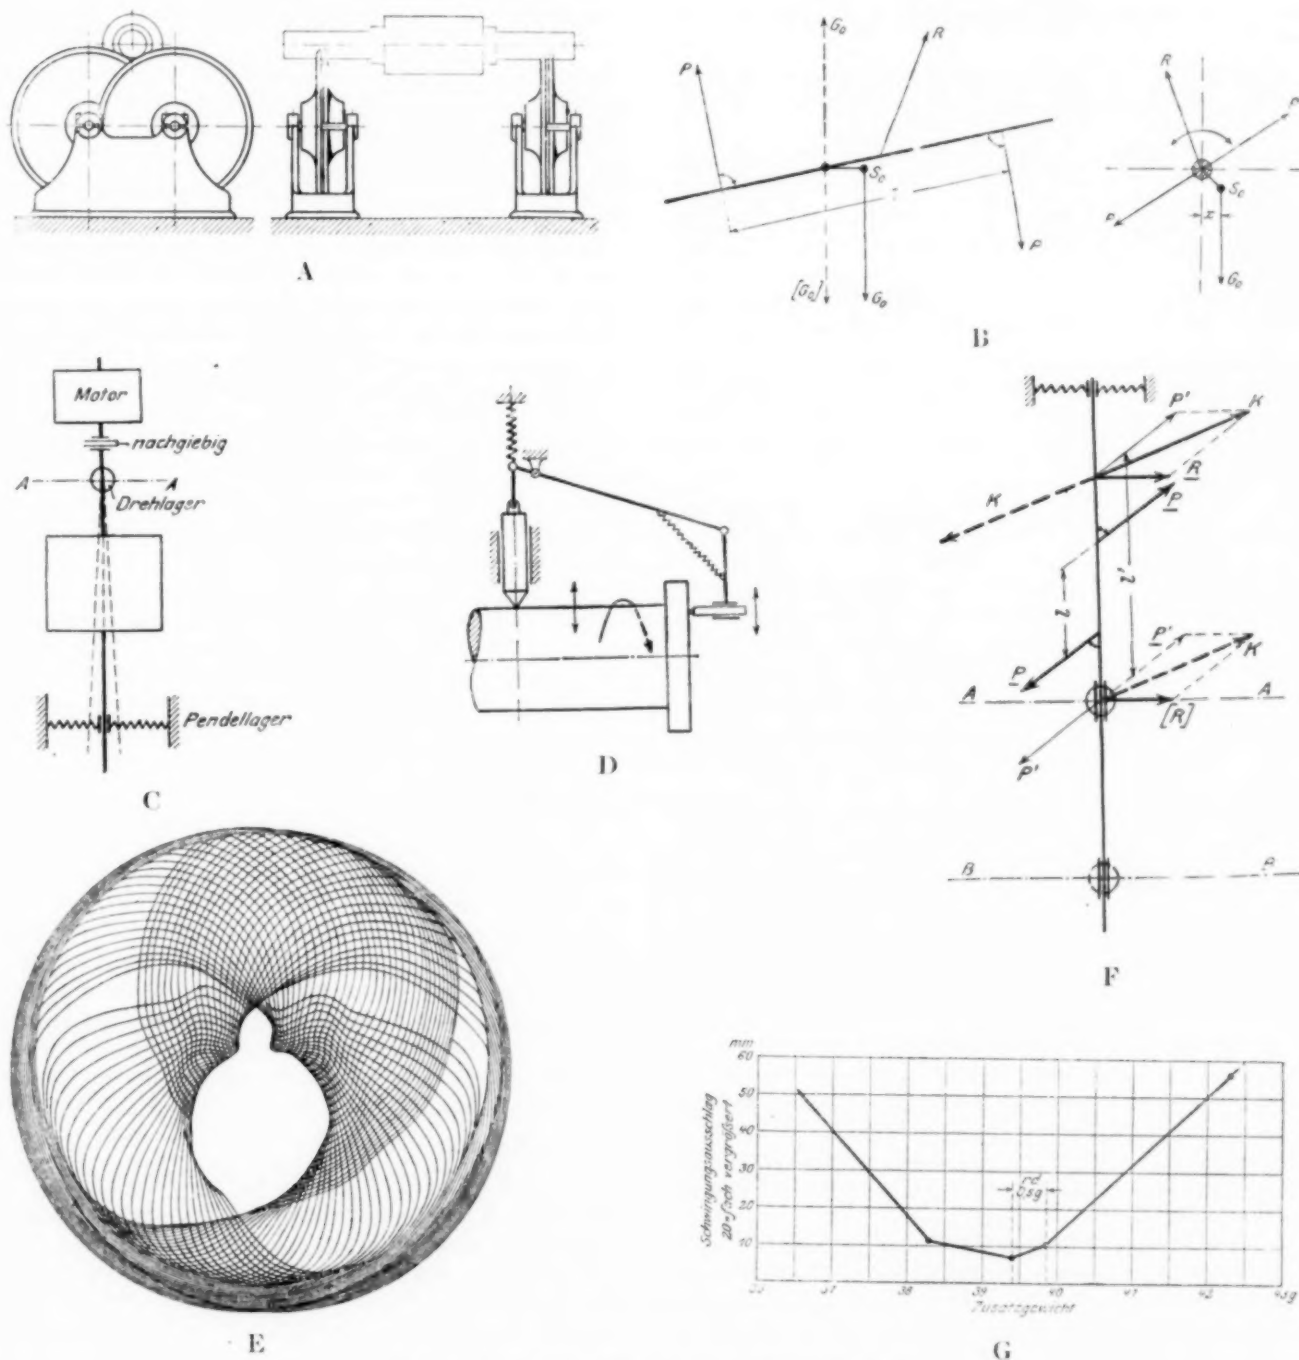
BALANCING OF ROTATING MACHINE PARTS
